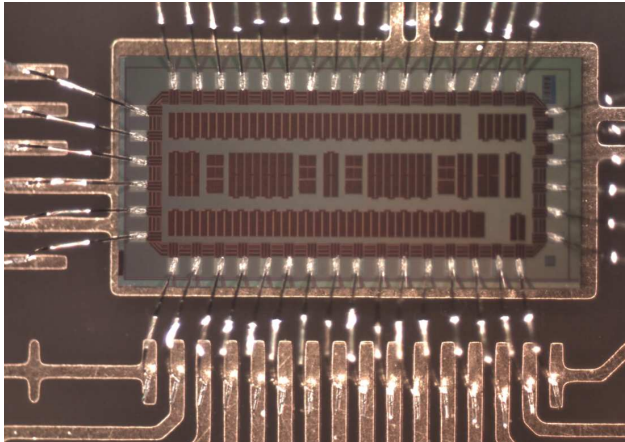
PADI2 (1.5 mm x 3.2 mm) bonded on test PCB.
